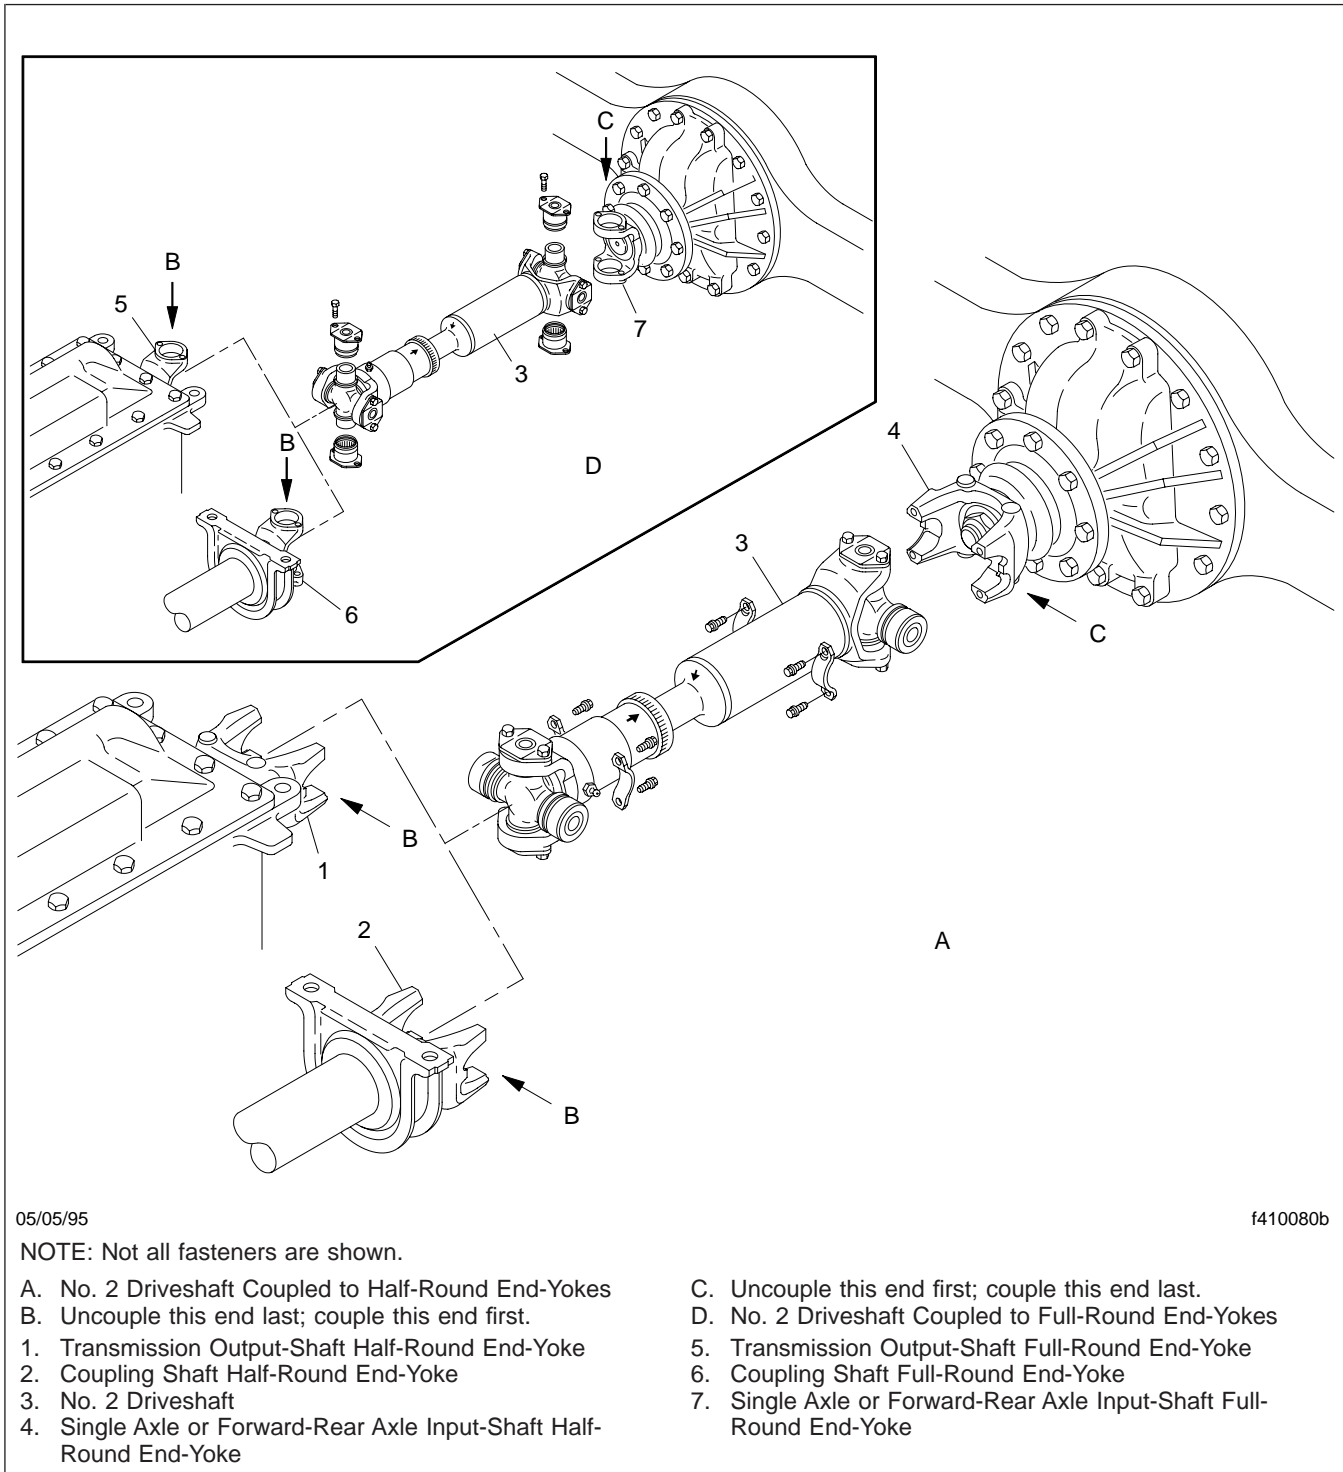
, Removal/Installation of a No. 2 Driveshaft Without RPL U-Joints
